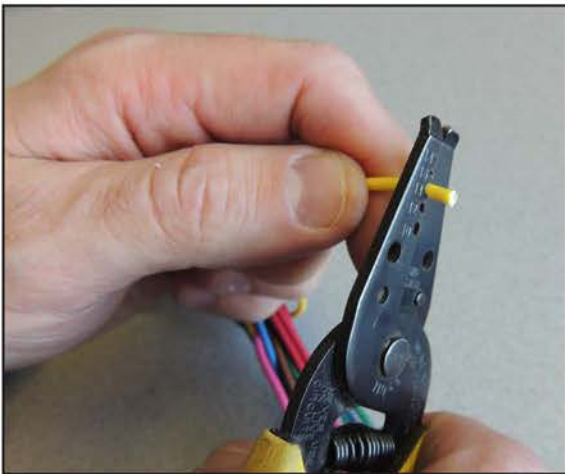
Use a wire stripper to remove 0.25" of the wire cover to expose the copper wires.
